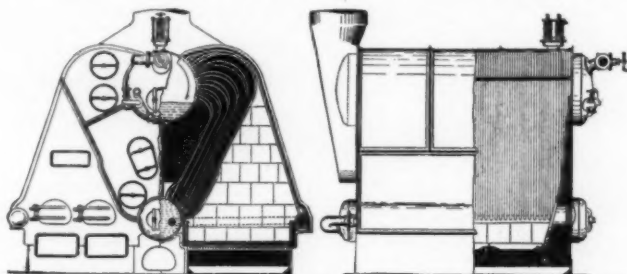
THORNYCROFT "DARING" WATER-TUBE BOILER FOR TORPEDO-BOAT DESTROYERS. ONE WATER BARREL BELOW THE STEAM DRUM.
